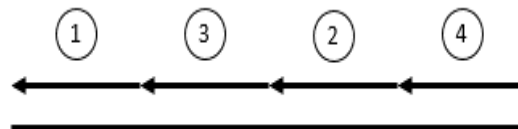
A sample of skip welding adopted by [87].
